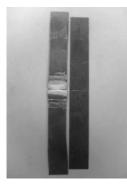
Test piece for tensile shear test Left: After the test, Right: Before the test
